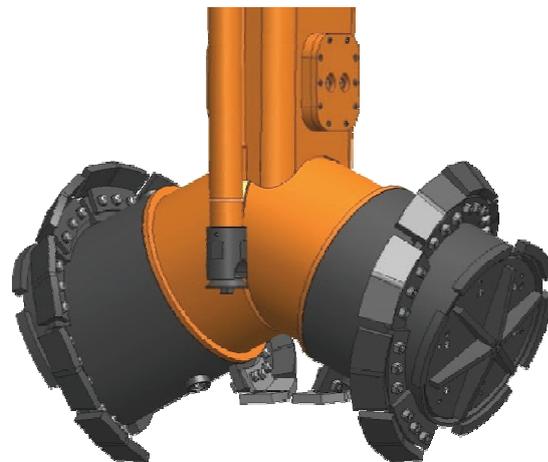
Mixing head with replaceable blades and binder feeding nozzle
